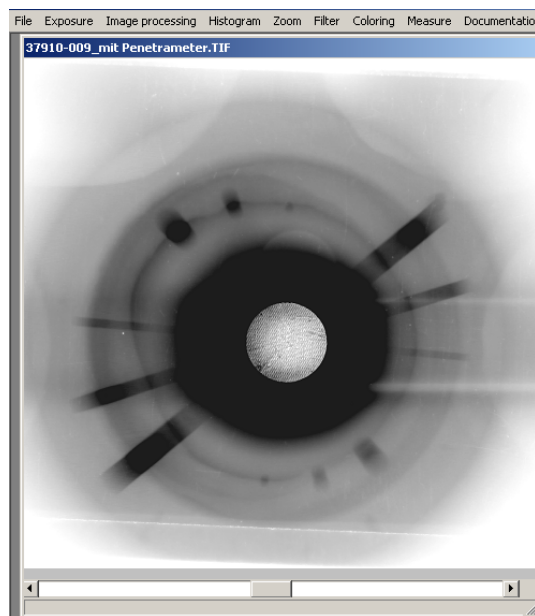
Digital radiograph from tube to bottom weld using an imaging plate
